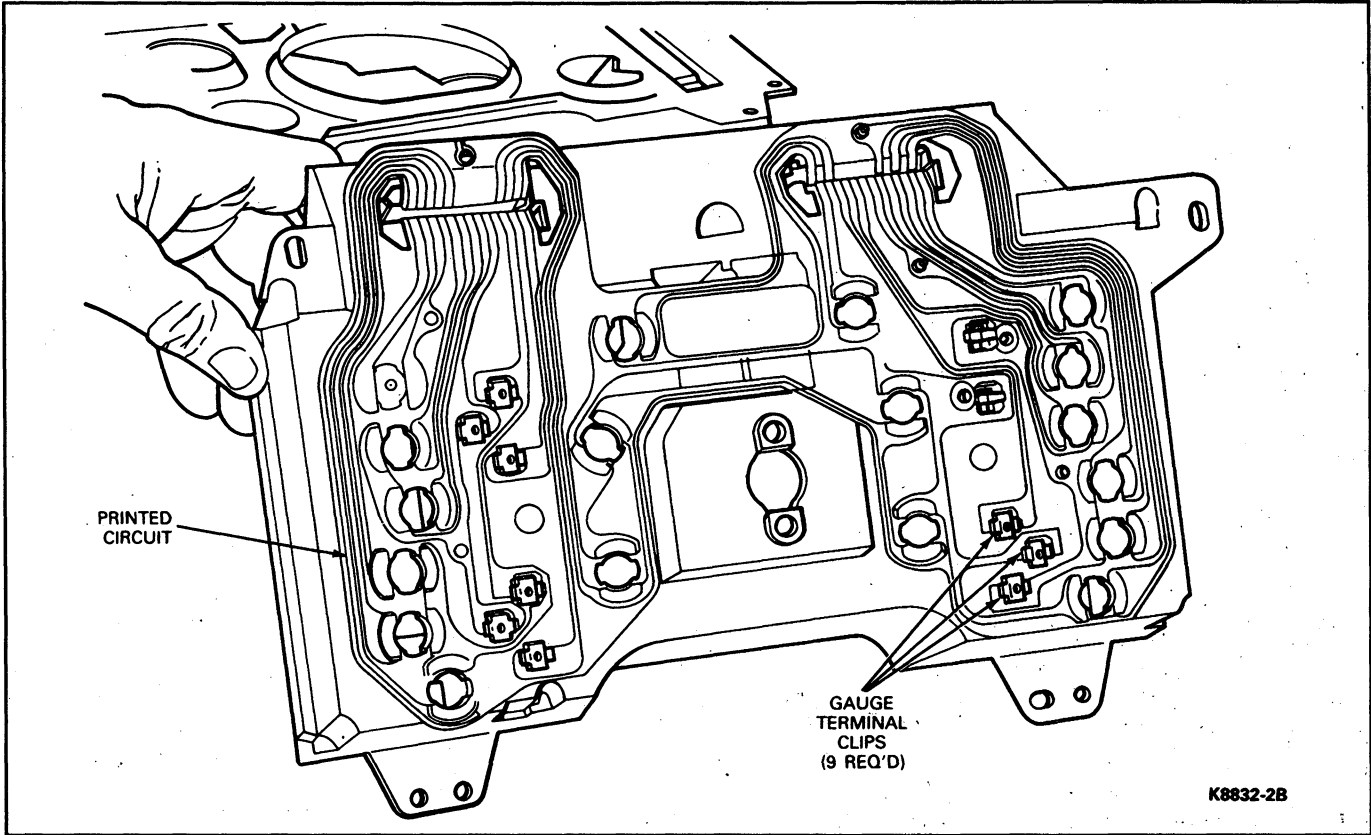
Instrument Cluster Rear View—F-Super Duty Commercial Stripped Chassis and Motor Home Chassis Vehicles
